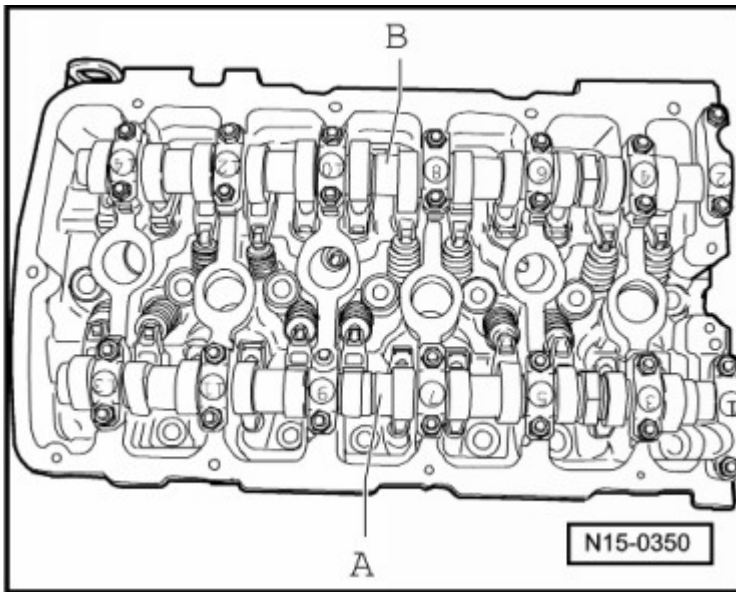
Identifying Intake Camshaft And Exhaust Camshaft
